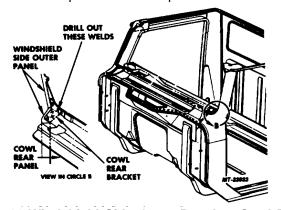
Windshield Side Outer Panel to Cowl Rear Panel and Bracket Spot Welds
